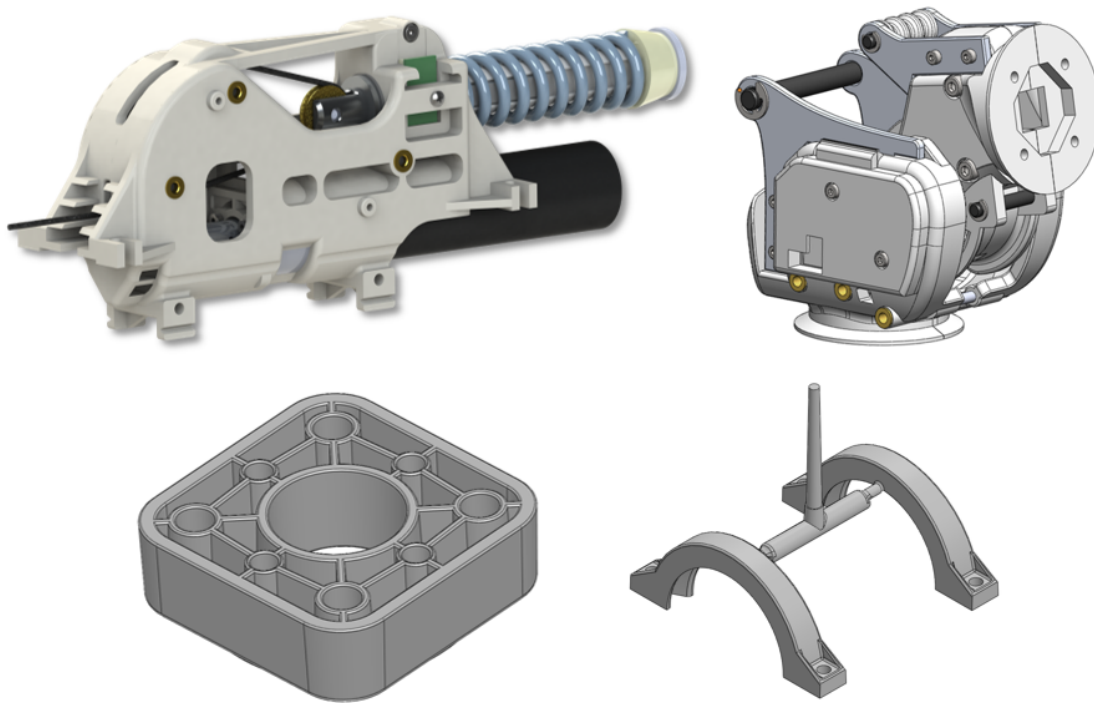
Toolkit parts adapted for injection moulding, from top left to bottom right: base of the MYO-Muscle - T1 - V1, upper and under joint forks of the MYO-Joint - T2 - V2, end-spacer of the MYO-Bone - T1- V1, clamping ring of the structural bond
